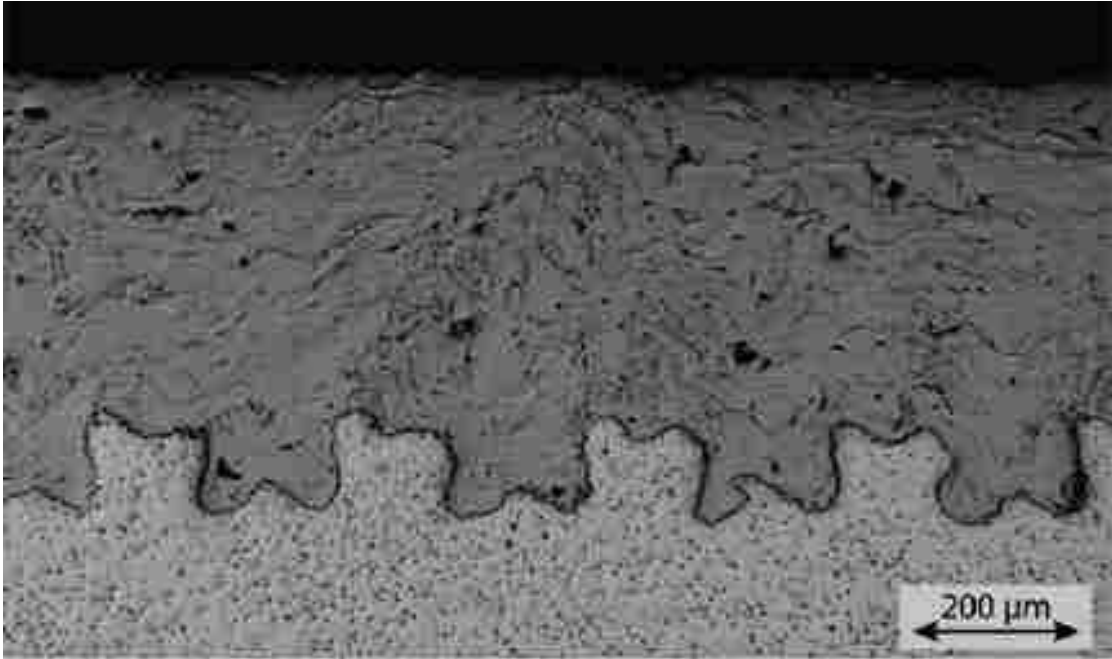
PTWA - Pre-treatment - Mechanical Roughening by "Dove-tail" Machining – Cross-sectional view [5]
